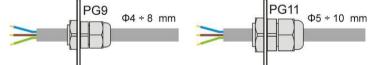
Recommended types and sections of installation cables PG9 and PG11 for cable glands.
